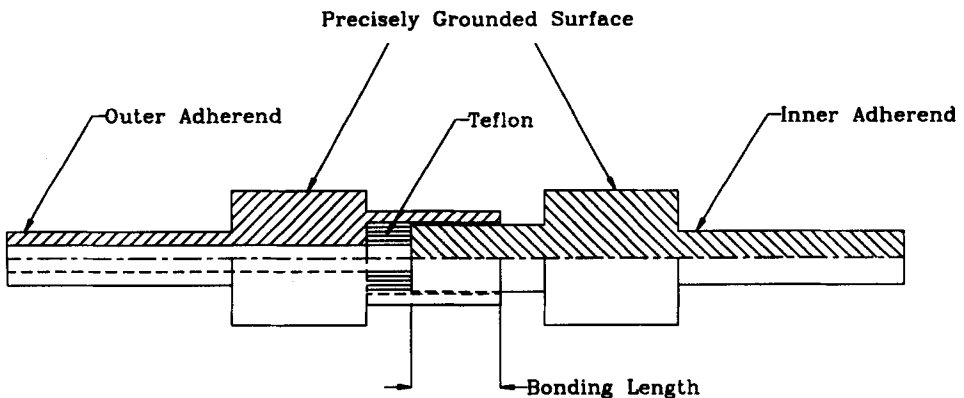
Configuration of the adhesively-bonded joint specimen.
